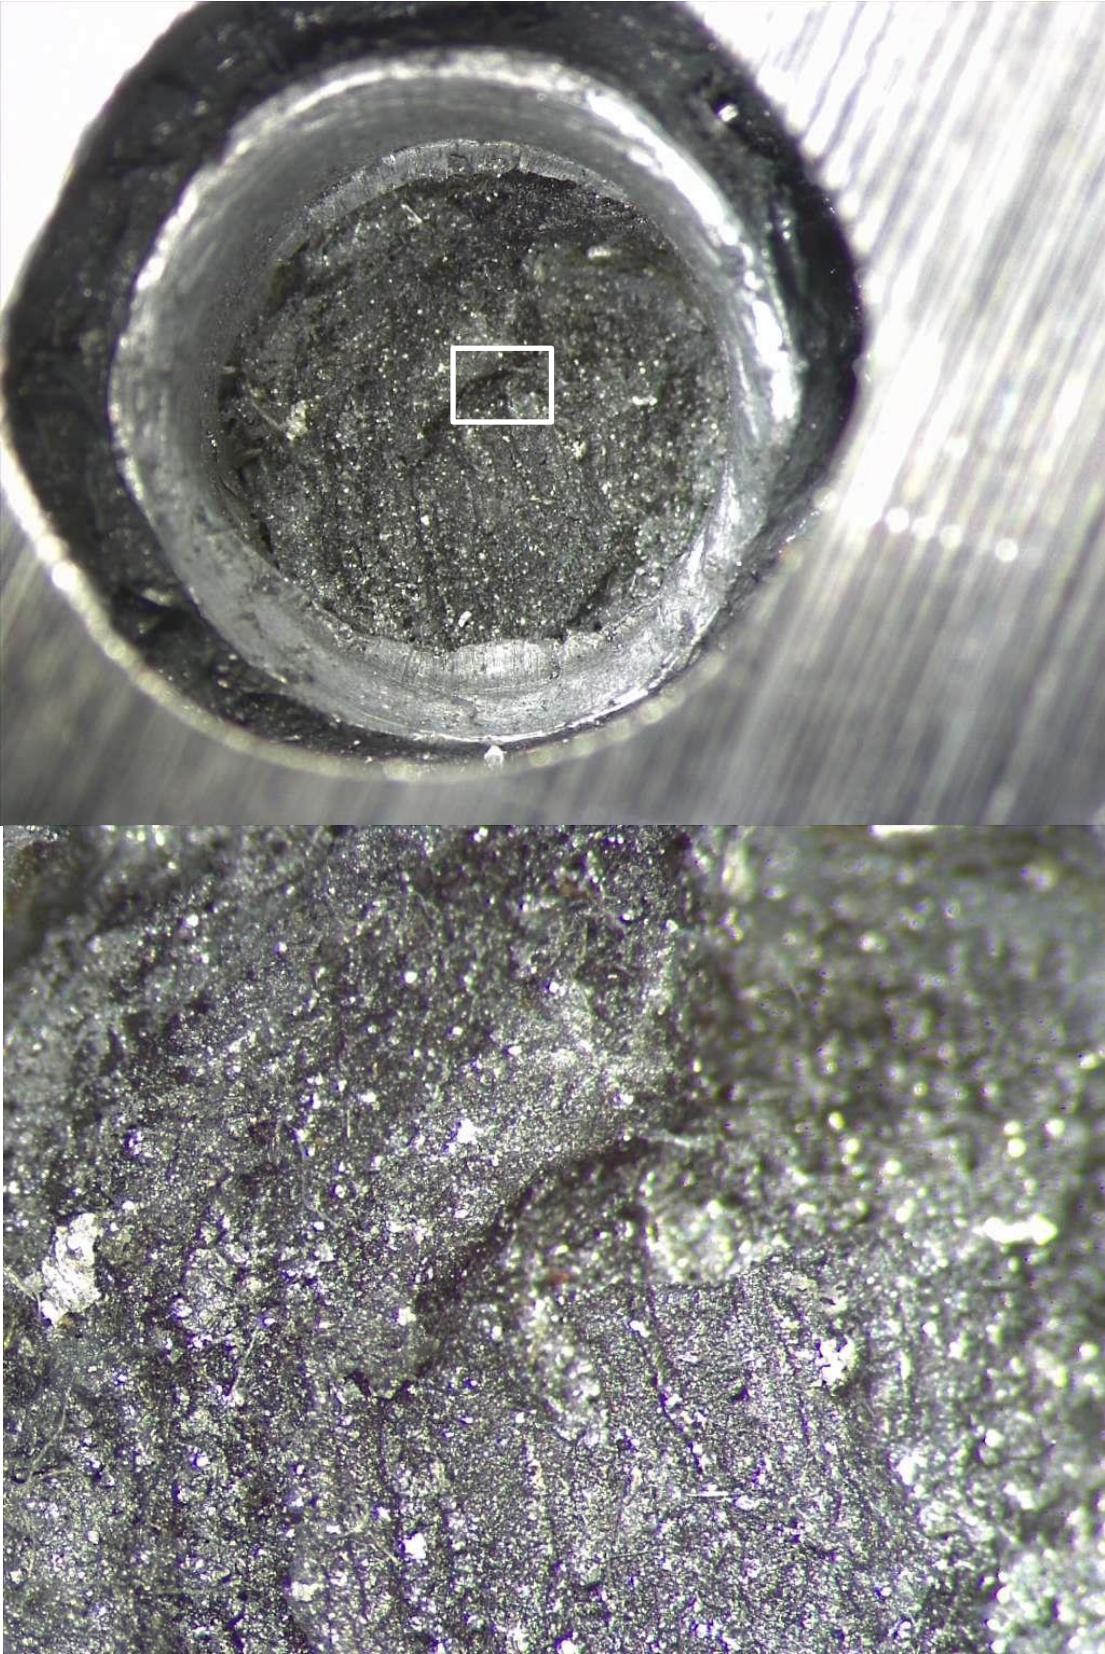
Microscopic Photos of Fracture Surface (1 of 2)
